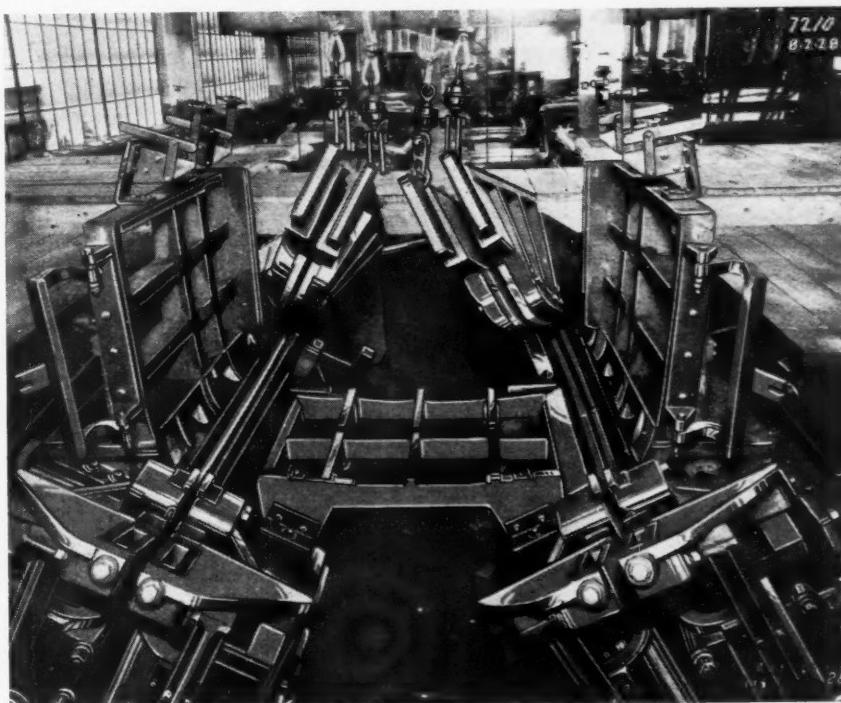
Showing details of fixture in which body panels are held for flash-welding in Budd plant
